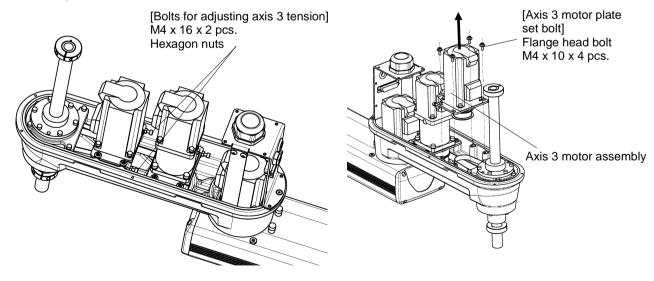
Dismounting axis 3 motor assembly (KHL-500, KHL-600, KHL-700)
